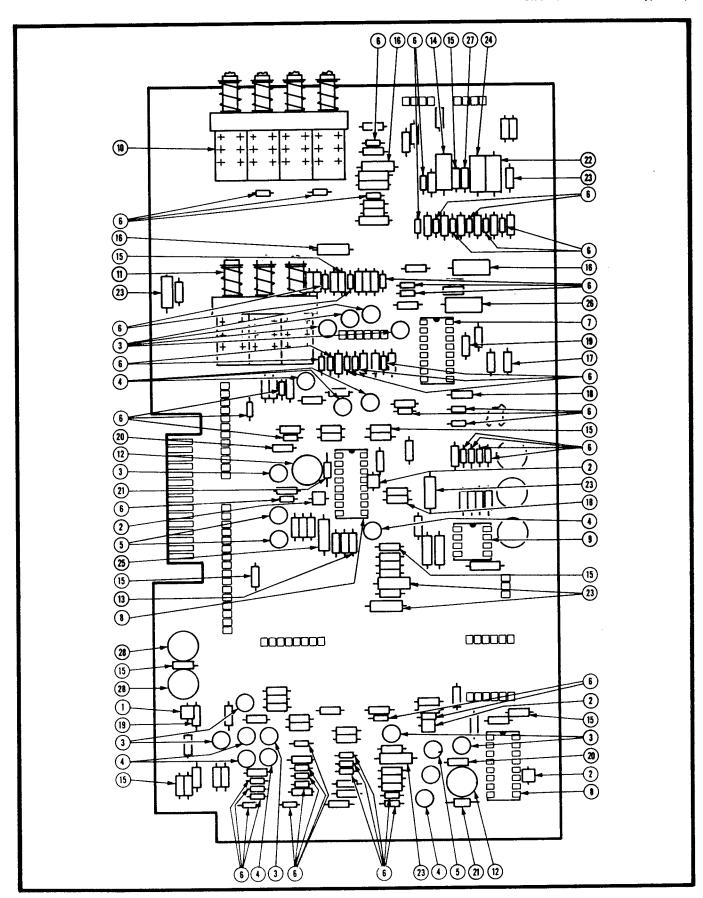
Circuit Board Assembly, Sweep (Sheet 1 of 3).
